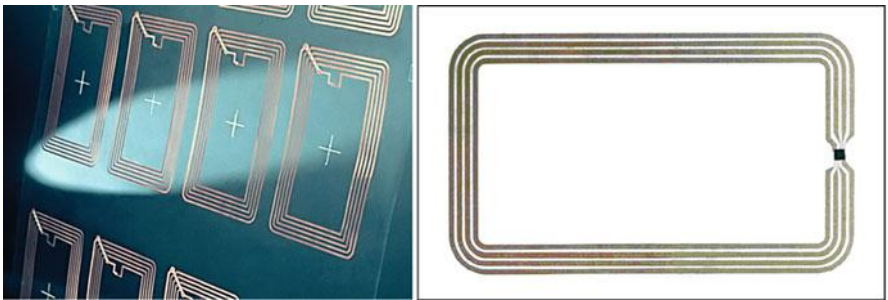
Printed silver ink antennae and assembled inlay with security controller
